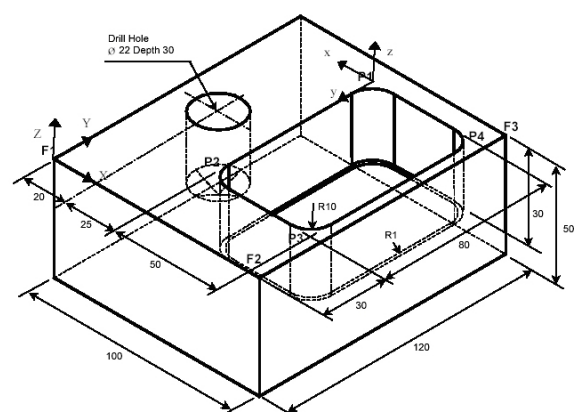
Machining example 1 of  ISO14649-11 [30]
